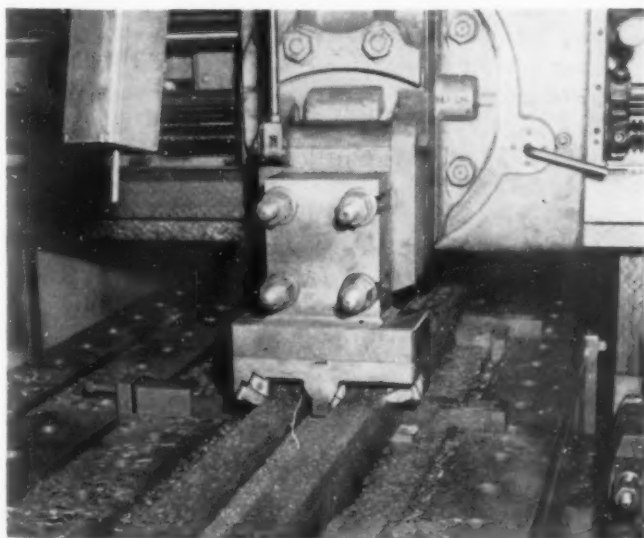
(left) Typical gang tool used for semifinishing hardened bedway of a horizontal boring, drilling and milling machine.
